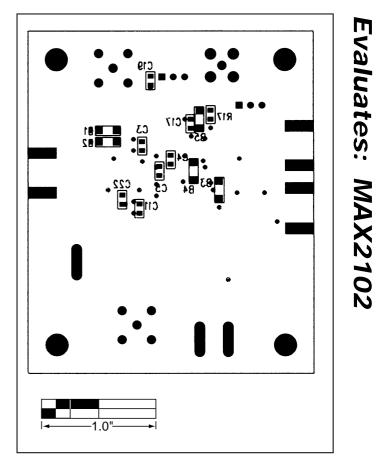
MAX2102 EV Kit Component Placement Guide—Solder Side
